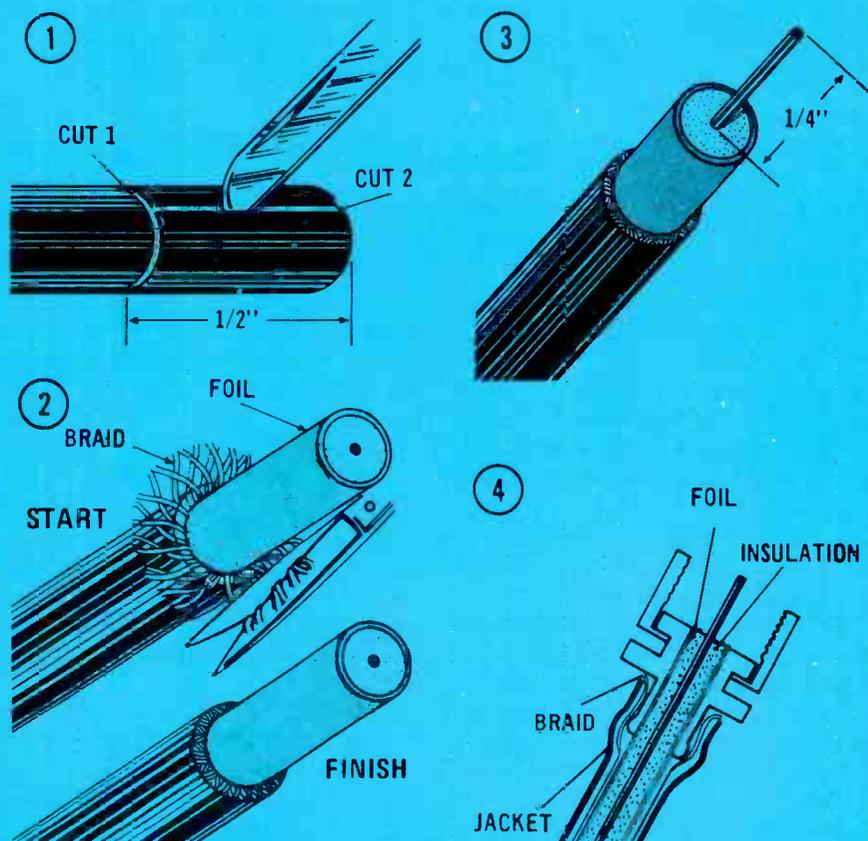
Use this method of installing F-56 and F-11 connectors on CAC-6 and CAC-11 coax cable: *Slide a weatherboot and a ferrule (if used) over the end of the cable. *Cut around the outer jacket 1/2 inch from the end of the cable, using a sharp knife. Make a cut to the end, and remove the piece of jacket. Don't cut deeply enough to damage the braid. *Fold back the exposed shielding braid and cut off the excess using scissors or cutting pliers. *Cut foil and dielectric foam 1/4 inch from the end of the cable and remove the pieces. Be careful not to nick or score the center conductor. *Dress the foil against the foam dielectric by twisting the cable between thumb and forefinger. *Lightly scrape the center conductor to remove any remnants of foam. *Push the connector onto the end of the cable. The bushing should seat between the foil and the braid for good contact. *Crimp the ferrule, and inspect the inside connector for any foreign material, such as metal chips or fragments of wire.
